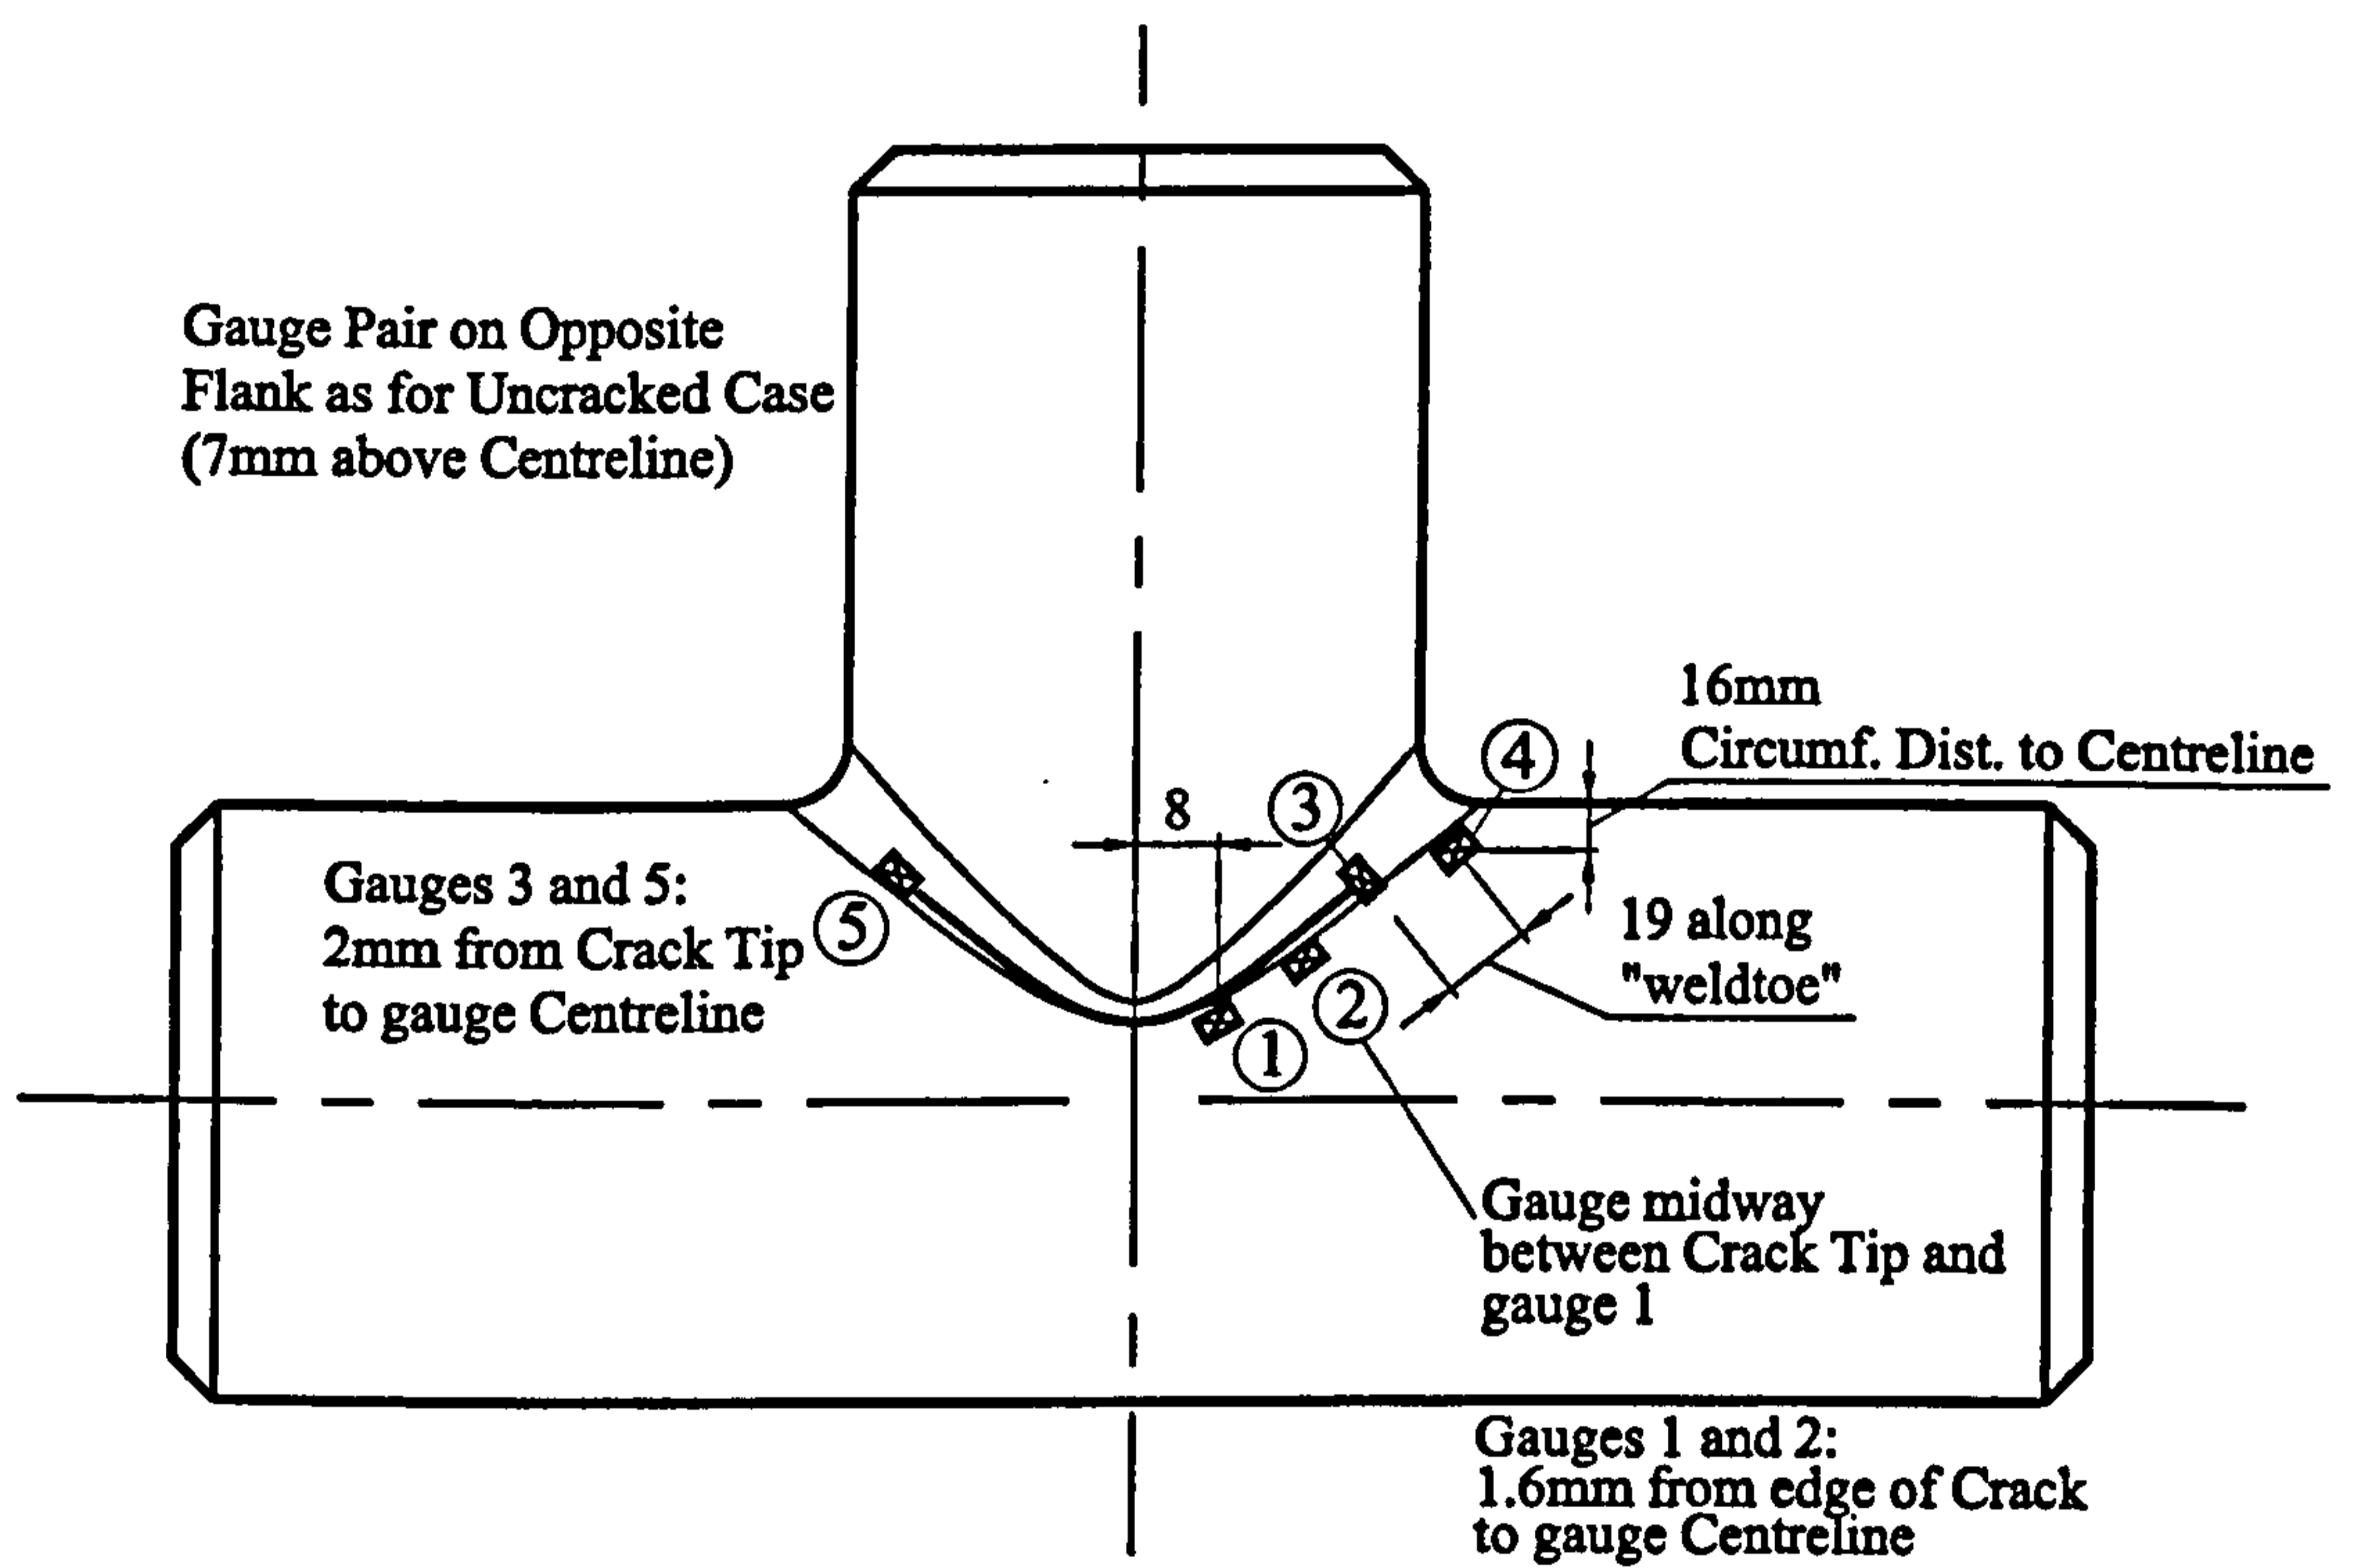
Strain Gauge Arrangement for Part-Penetrating Pressure Model
